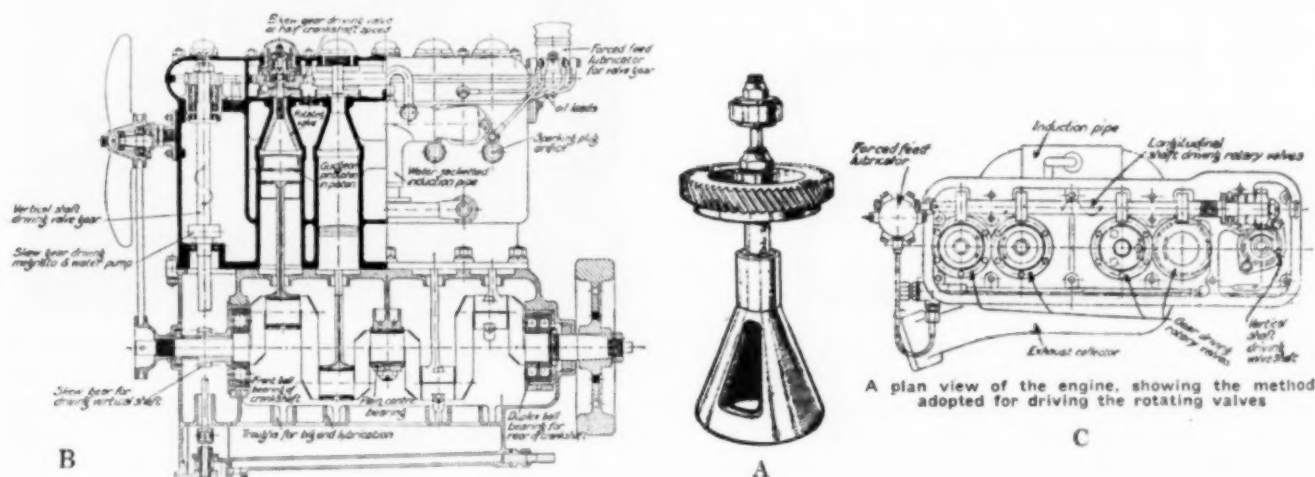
THE MAB RACING ENGINE AND ITS ROTARY CONICAL VALVE
